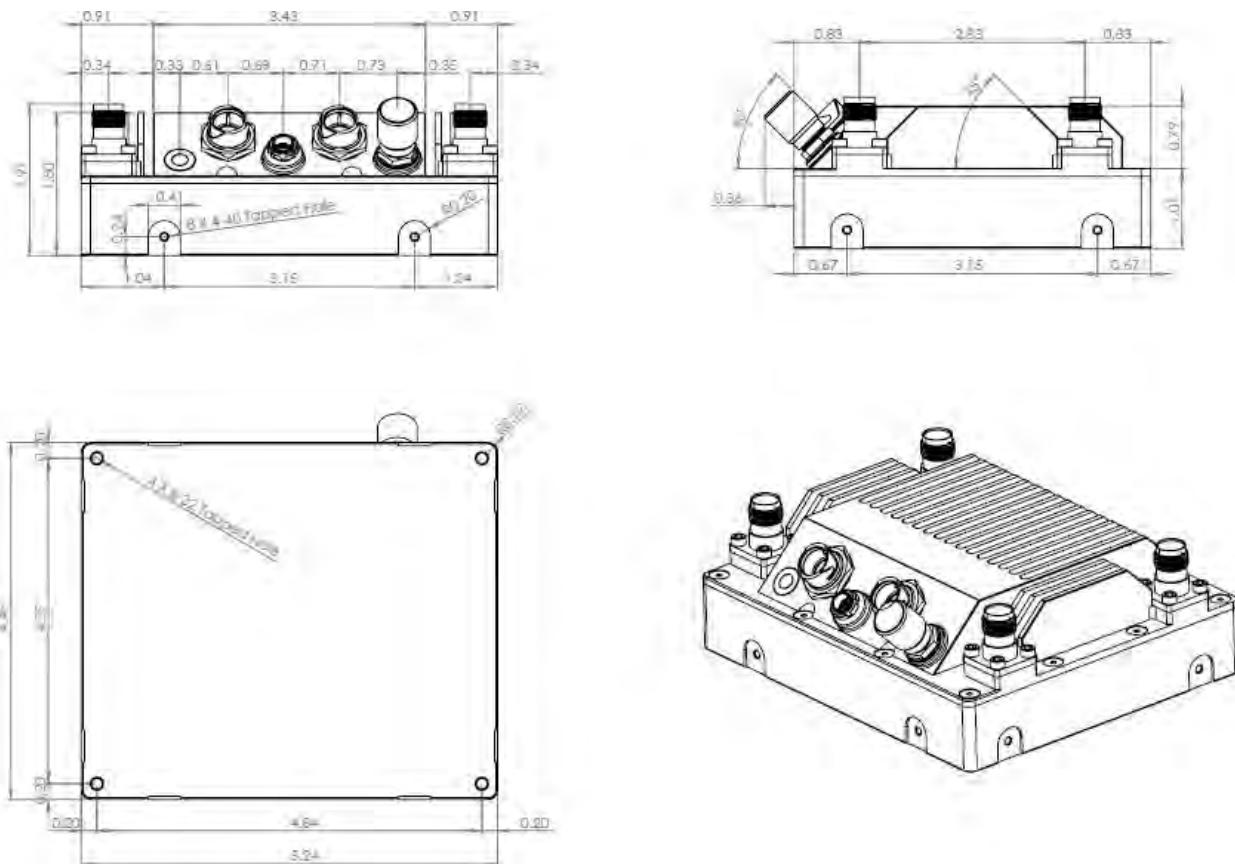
SC4400 Mechanical Drawing (top) and Mounting Pattern (bottom)
